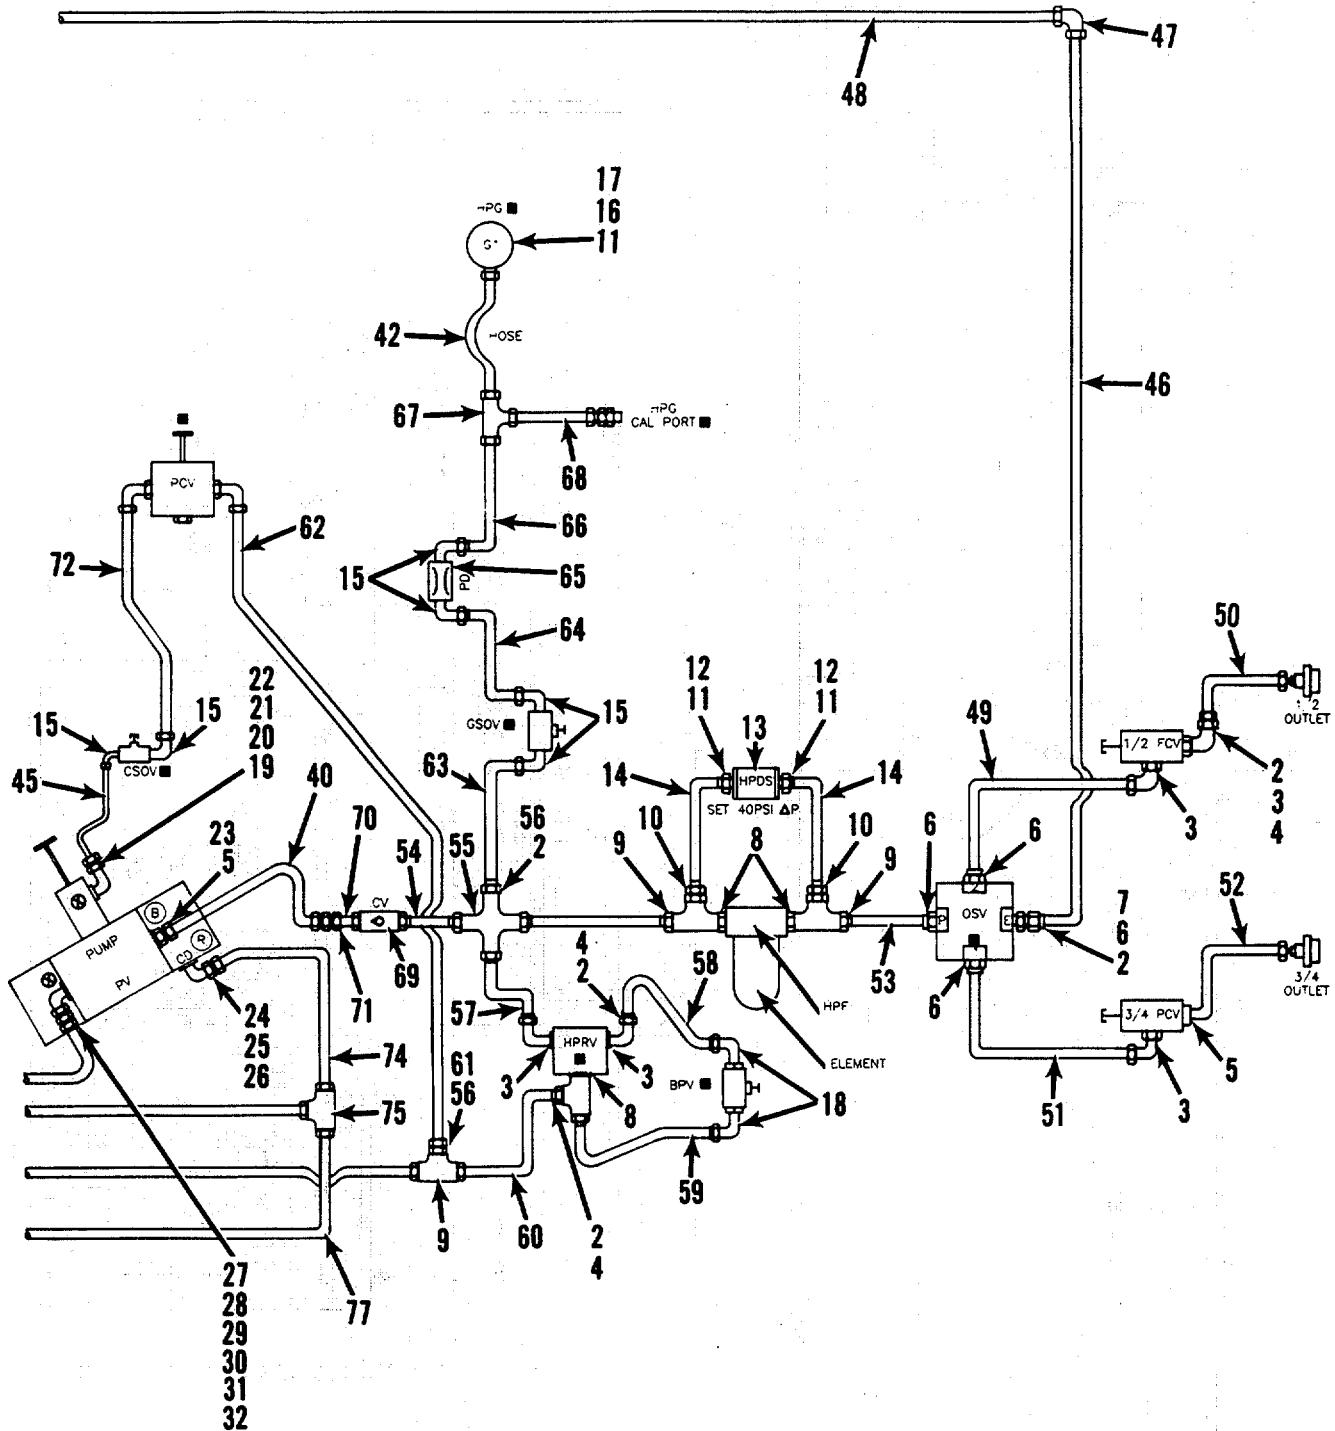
Hydraulic Piping Installation, D-6A (Sheet 2 of 2)
